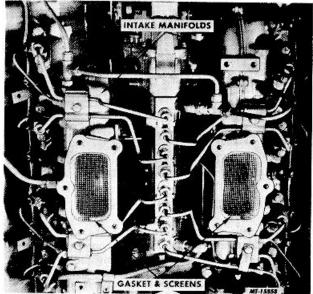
Air Cleaner Adapter-to-Manifold Gaskets and Screens
